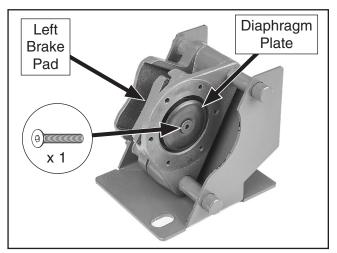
Location of diaphragm plate and mounting screw, and left brake pad.
